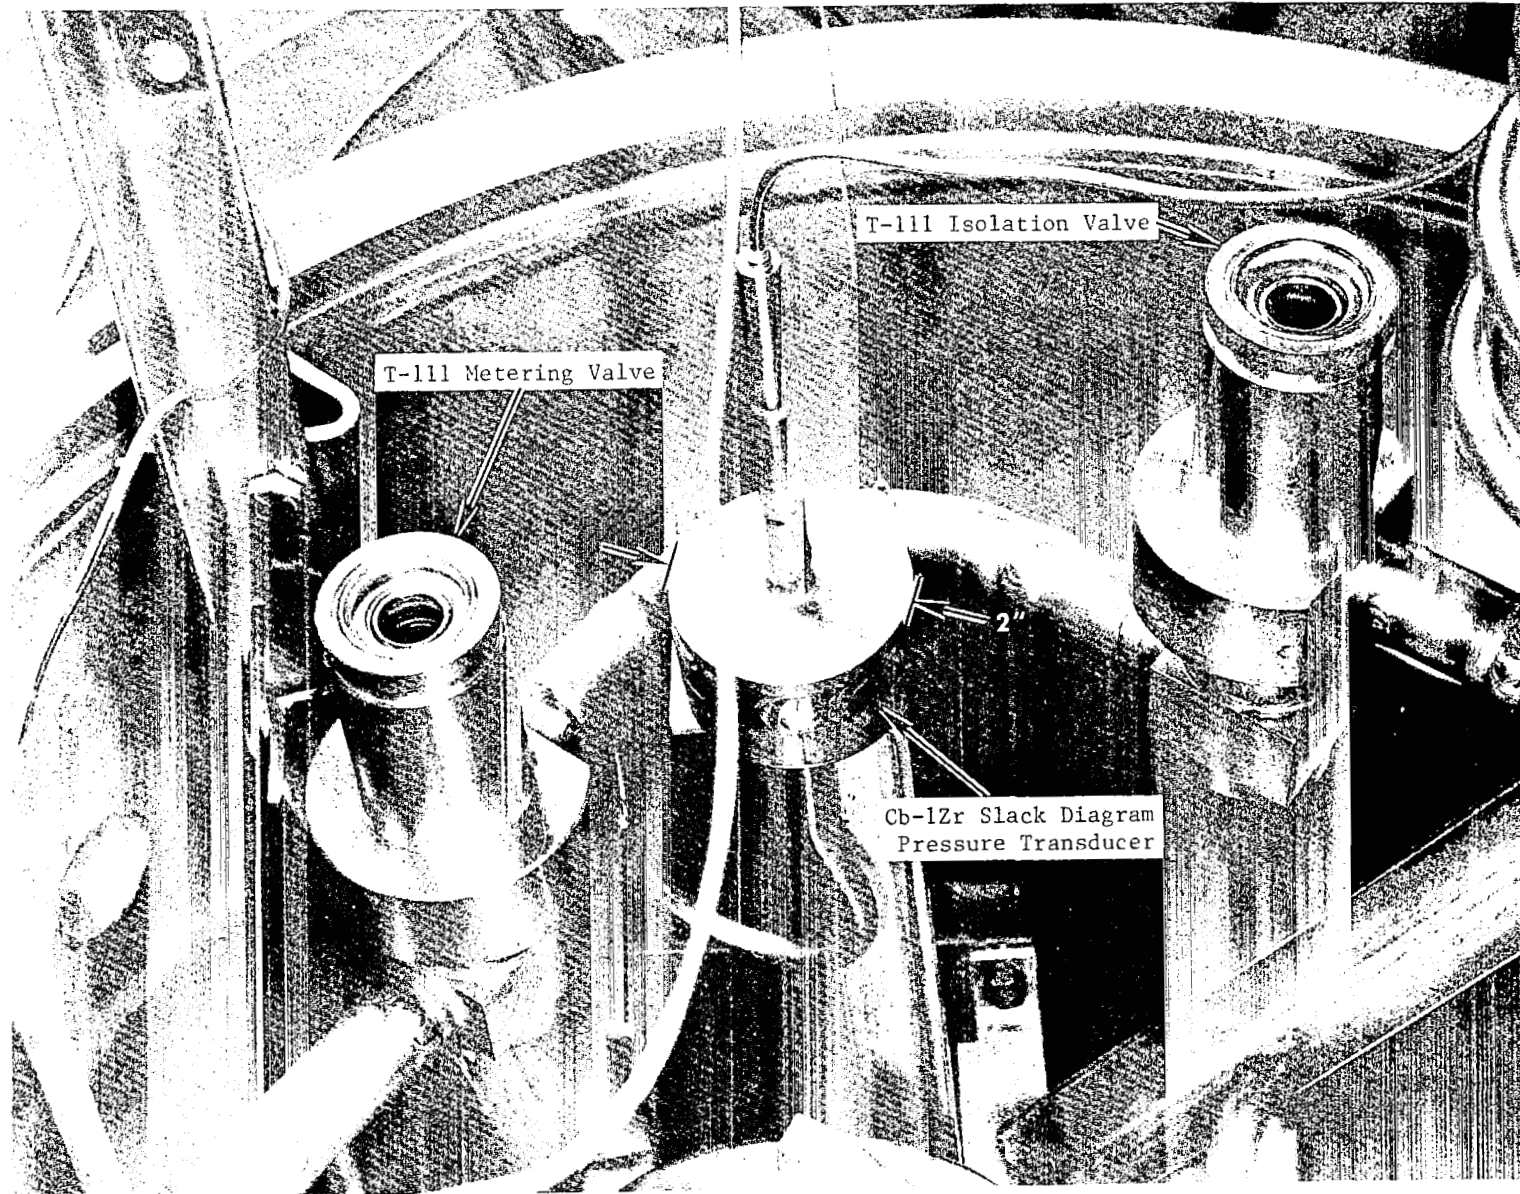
High Temperature Alkali Metal Valve Subassembly. (C68031433)
